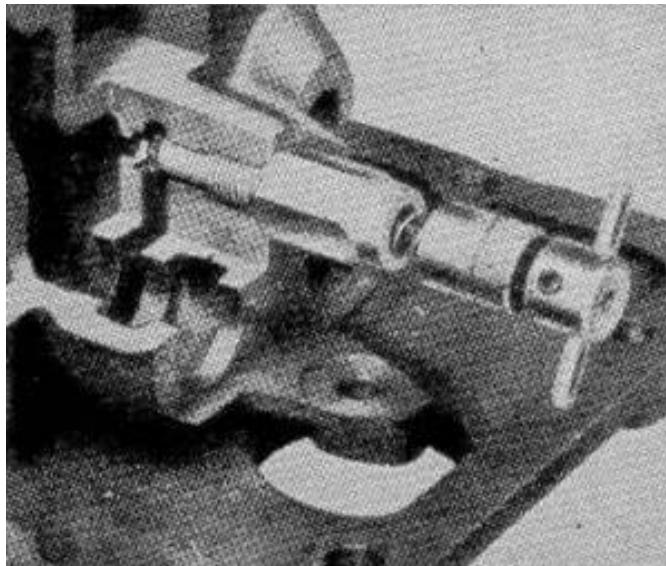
Improper seating of the check valve portion of relief valve unit may be corrected using a reseating tool as shown.
